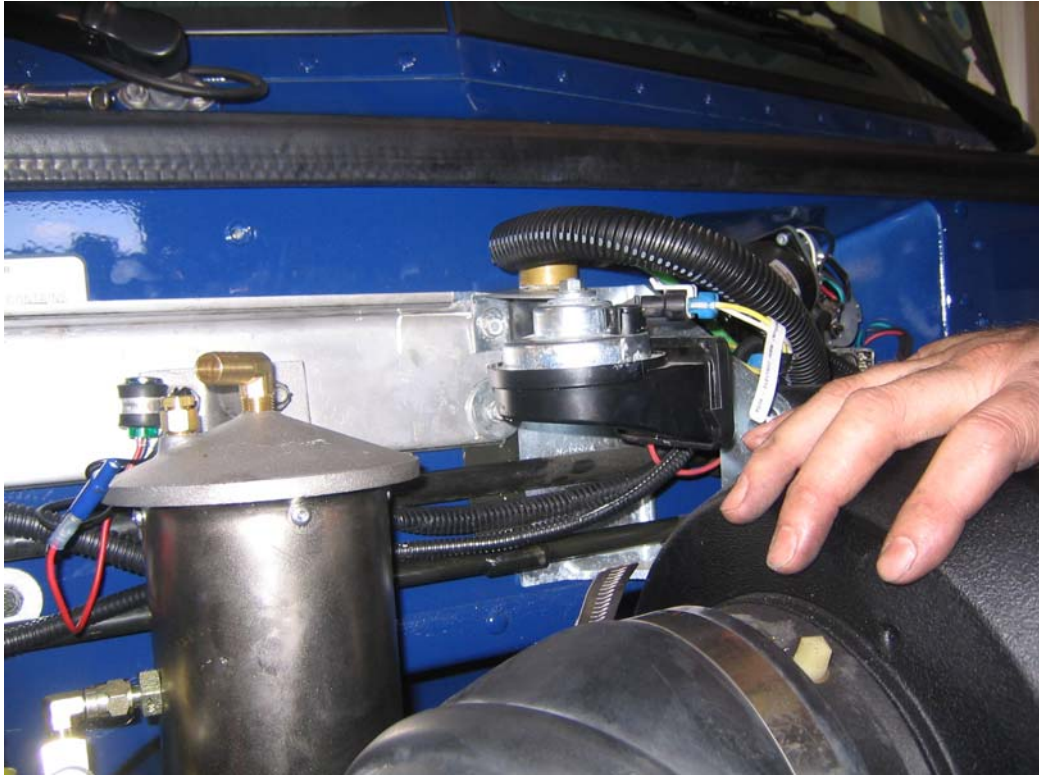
Attaching the Driver Side of the Evaporator Mounting Bracket
